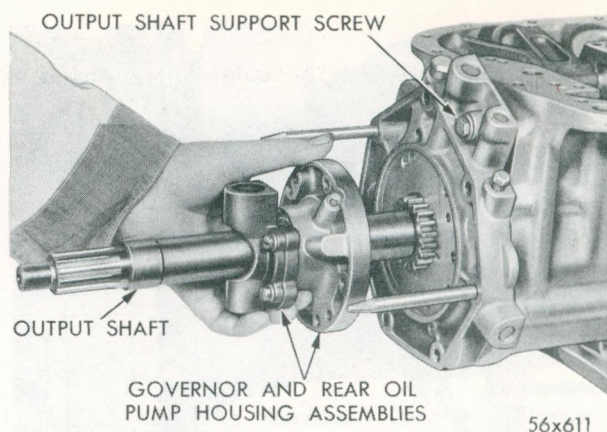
Removal and Installation of Governor and Rear Oil Pump Housing Assemblies
